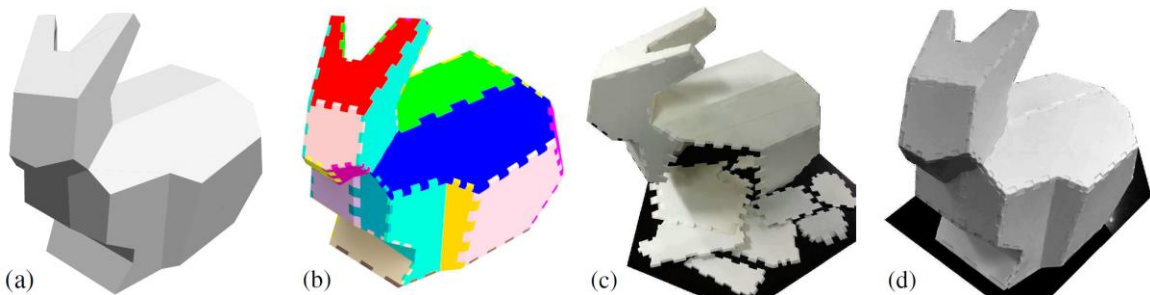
Bunny produced by 3D printing. (a) Simplified bunny model that has 35 planar faces. (b) Simulated model assembly with bevel joints; each face is indicated by a different color. (c) Partly assembled model. (d) Fully assembled model.
